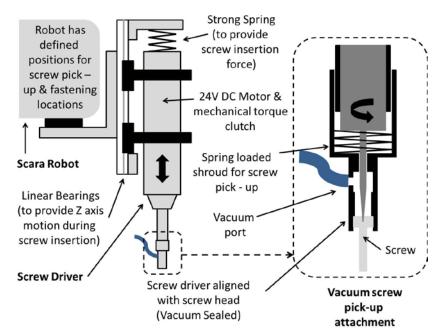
Screw driver end-effector & Cross section view of screw pick-up attachment
